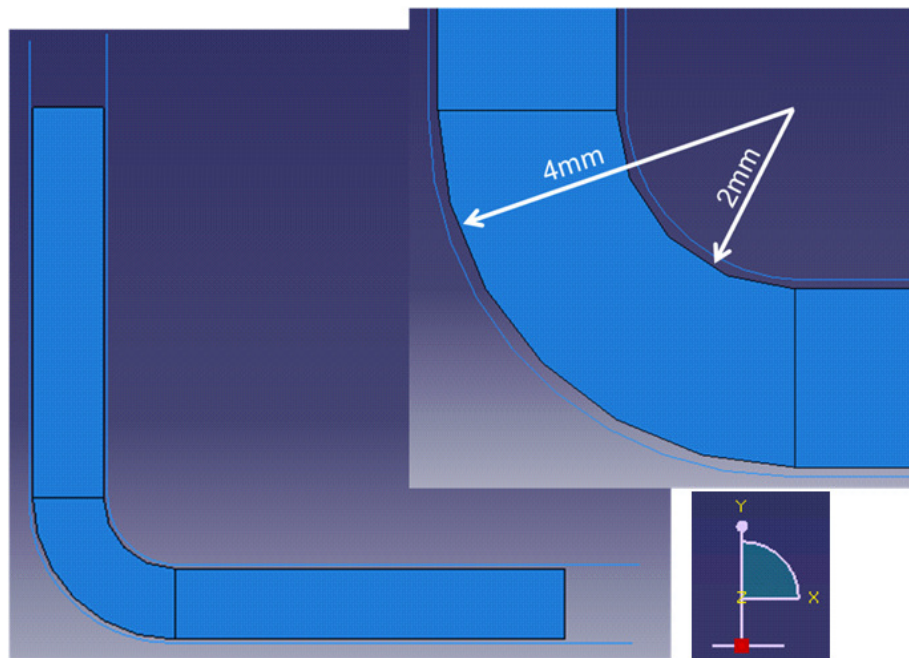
2D FE model geometry showing the cross section of the laminate; upper and lower rigid body surfaces represent the forming rollers
